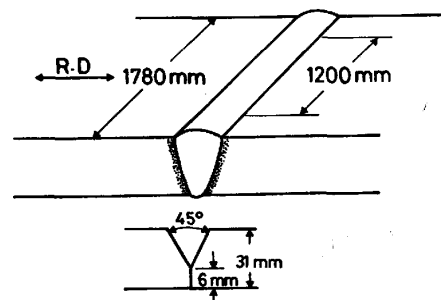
Groove geometries for submerged arc welding with heat input of 200 kJ/cm.
